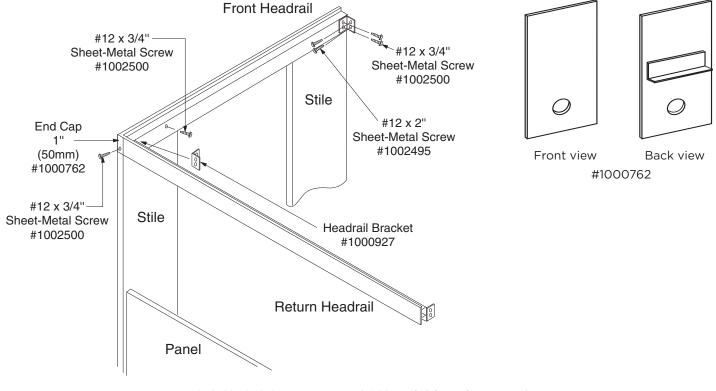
Headrail Installation Hardware. Corner Configuration.
